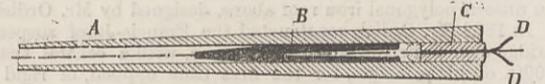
THE RUGGIERI FUSE OR PROJECTILE IGNITER.
